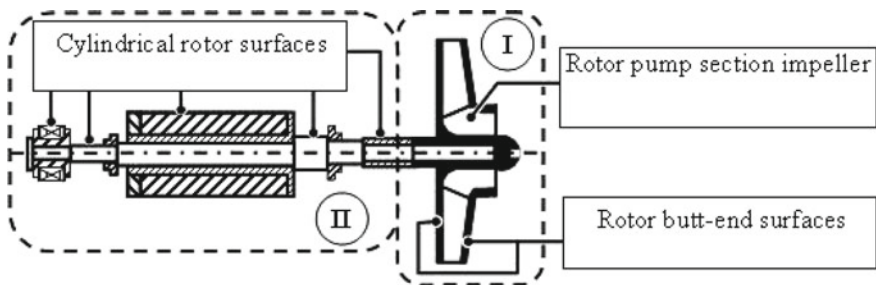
Electric-driven pump rotor subdivided into parts as per functionally: I—rotor pump section; II—rotor driving section
